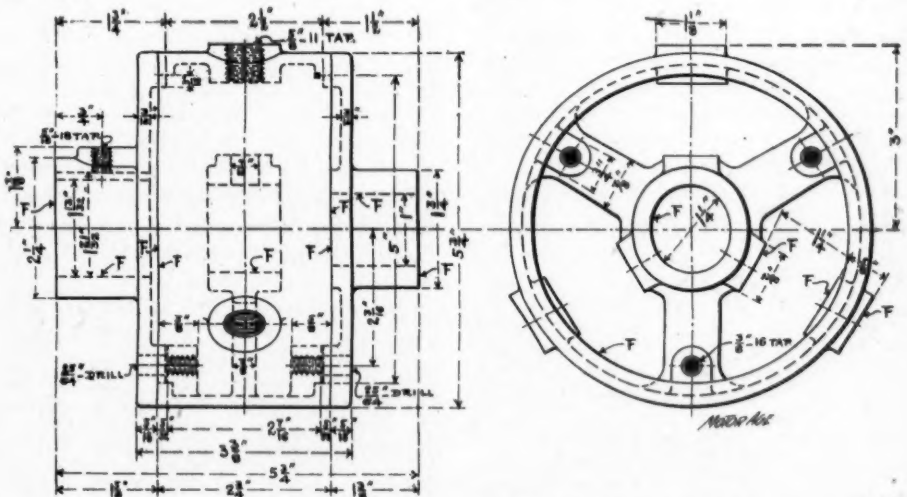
DIFFERENTIAL GEAR CASING (COMPLETE).
